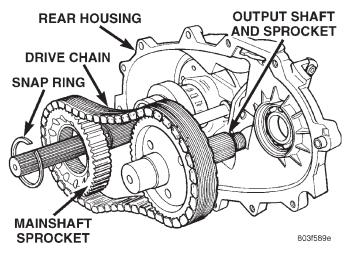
Front Output Shaft, Drive Gear And Chain Removal
